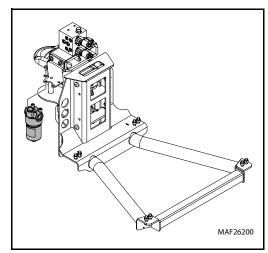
Capacity Switch Installation - Sheet 2 of 2
